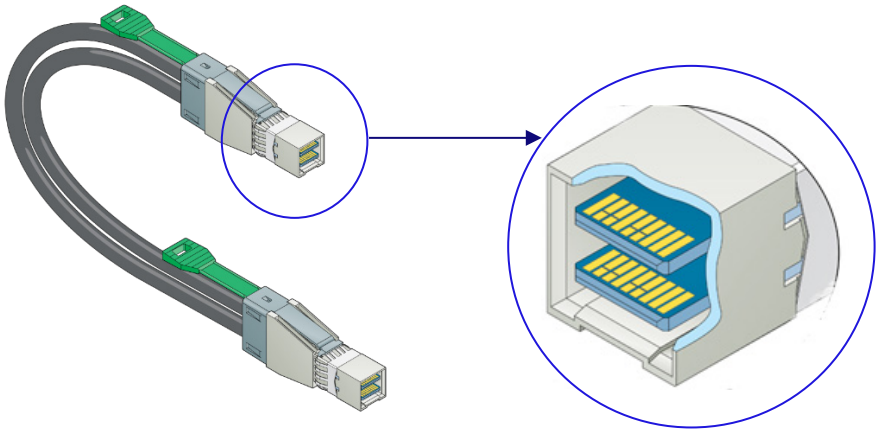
Cable Assembly with SFF-8644 Connectors
